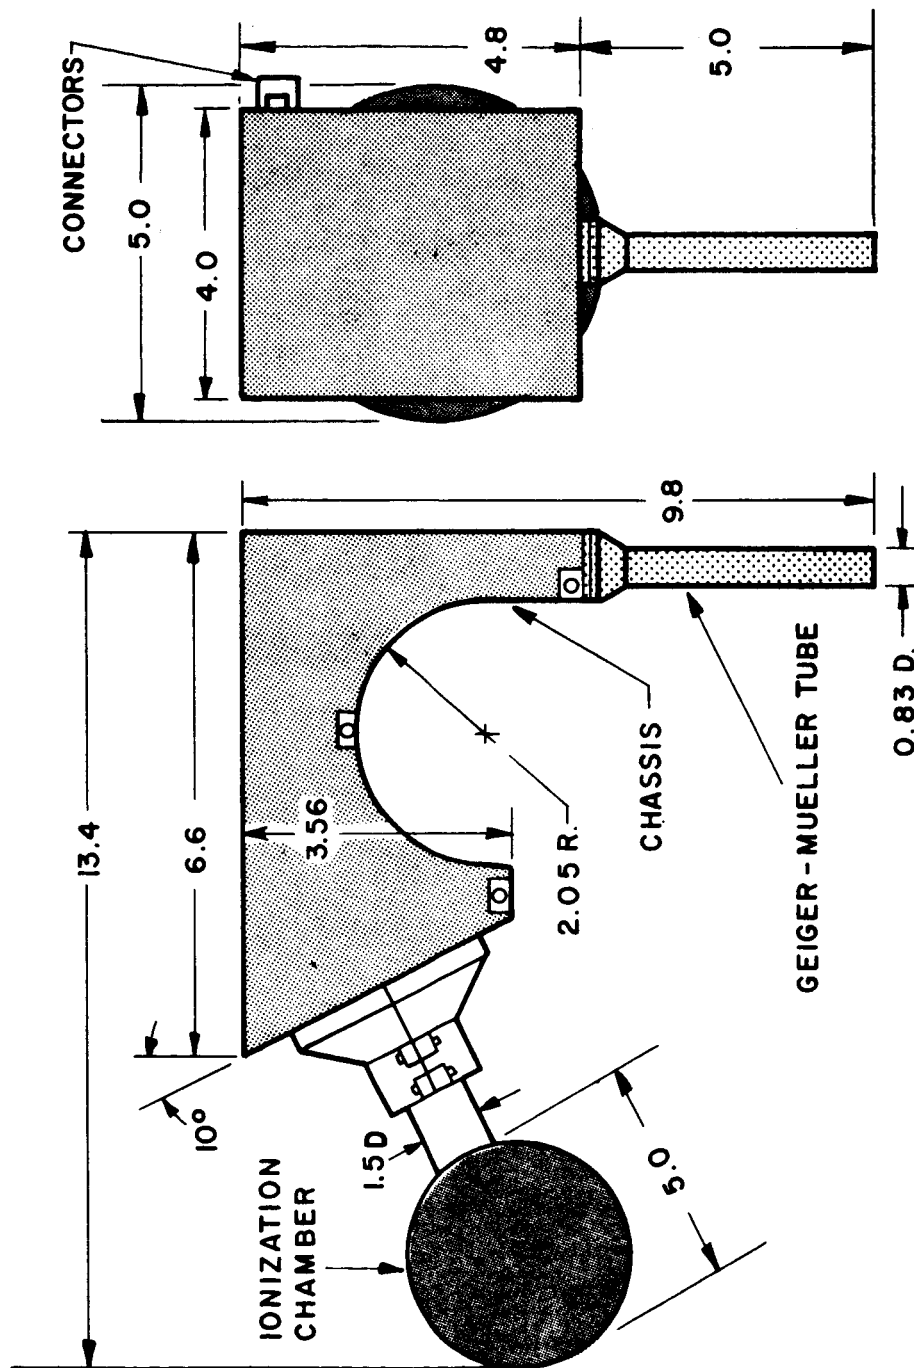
OUTLINE DRAWING OF ION CHAMBER-GEIGER TUBE INSTRUMENT
